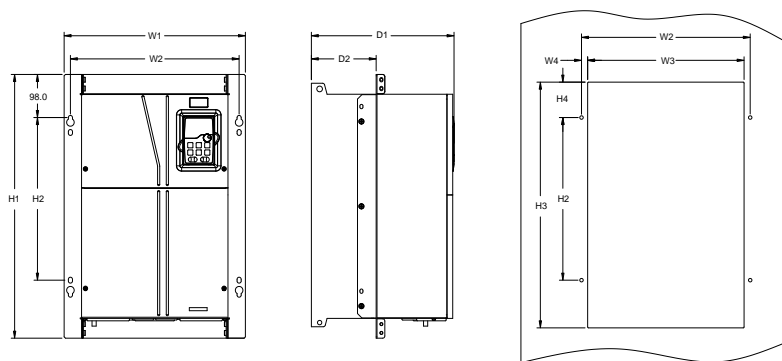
Flange mounting for 380V 90-110kW VFD models
